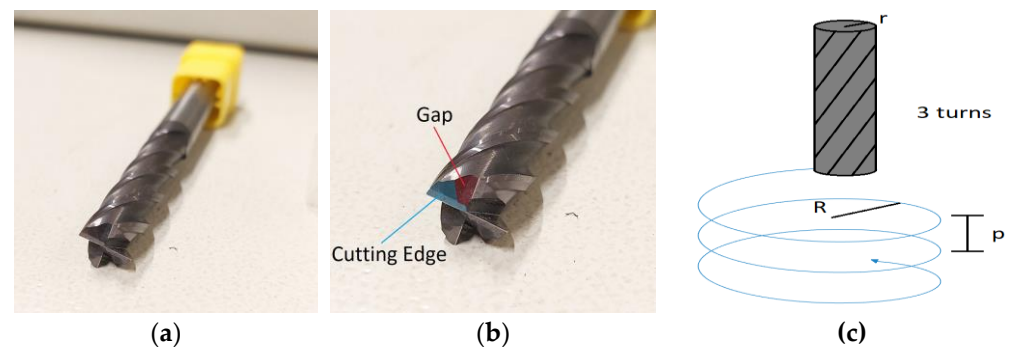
4 edges 50° d10*D10*100L 4F End Mil milling cutter: (a) Inside the packaging; (b) Cutting edges; (c) helical movement of the milling cutter.
